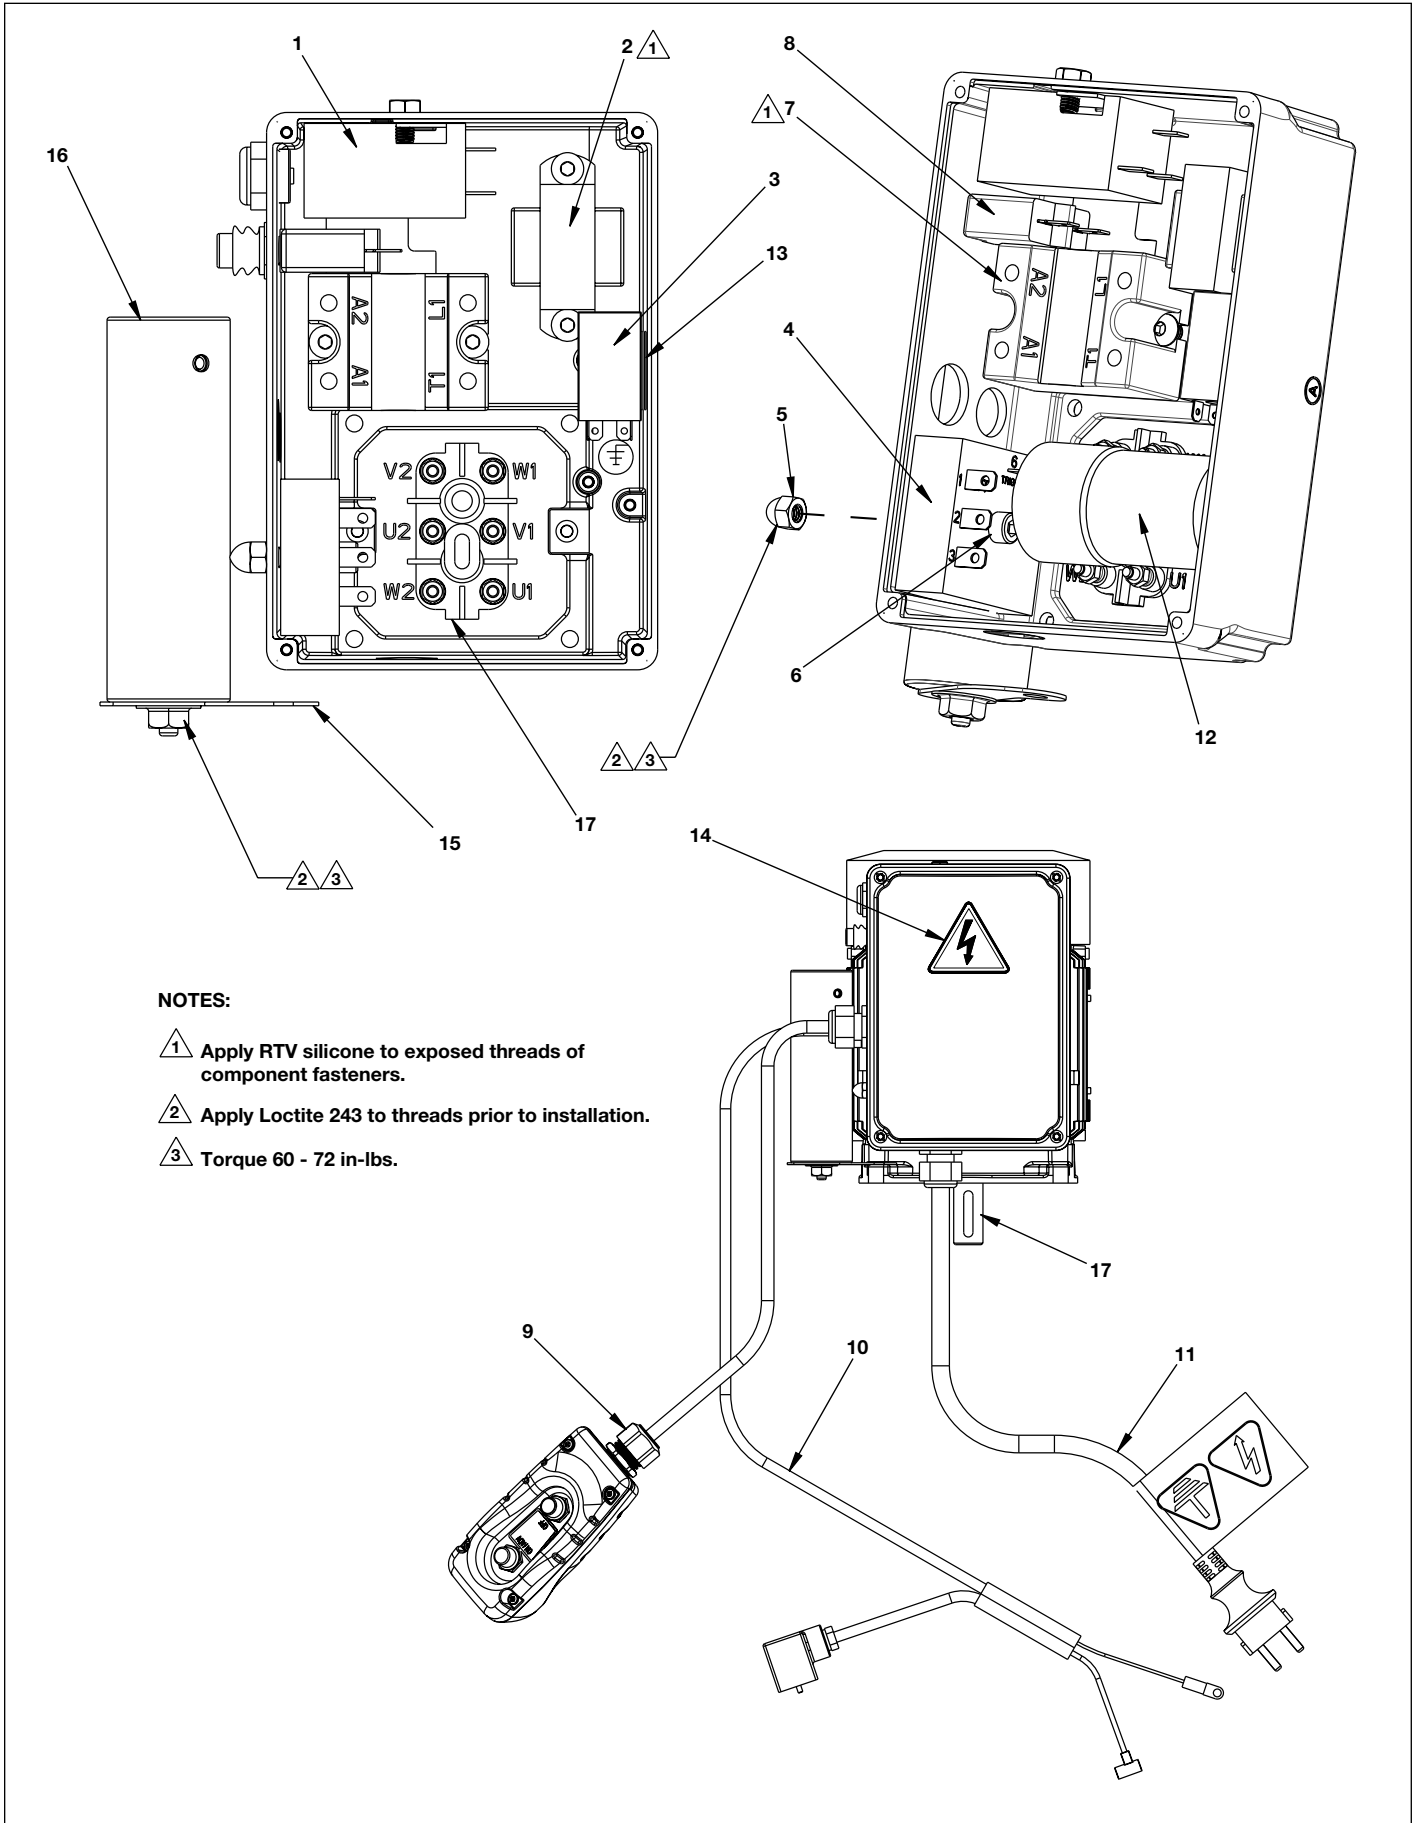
, Electrical Box and Motor Assembly, 230V 50/60Hz
